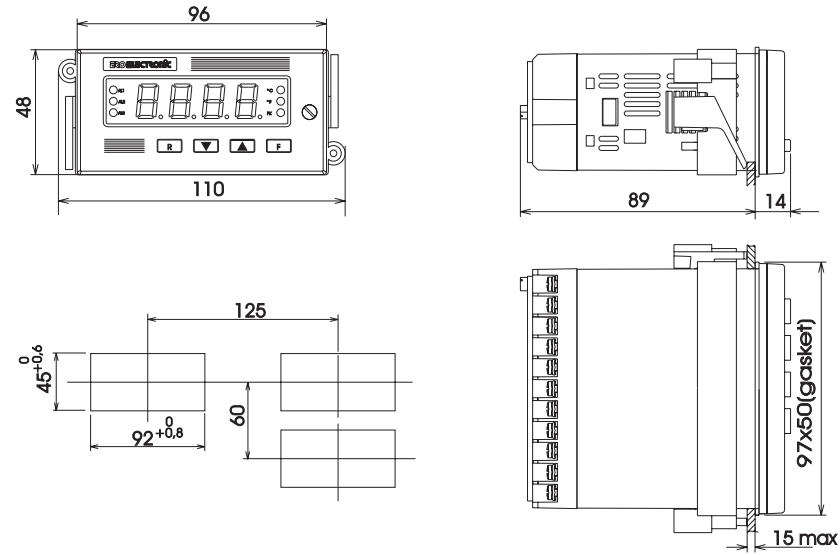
A TIS - OUTLINE AND CUT-OUT DIMENSIONS
